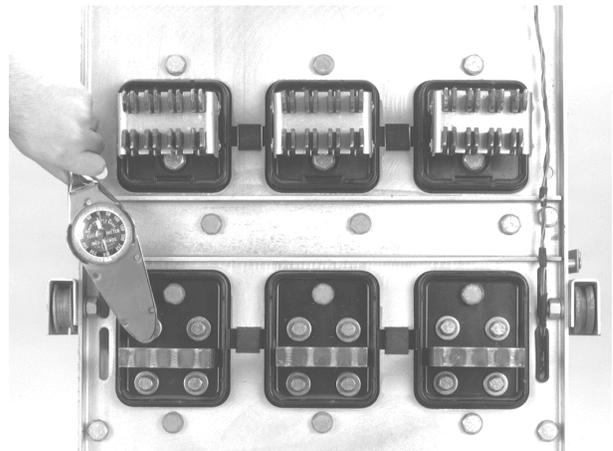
Tightening the CT assembly mounting bolts on the rear of the breaker.
